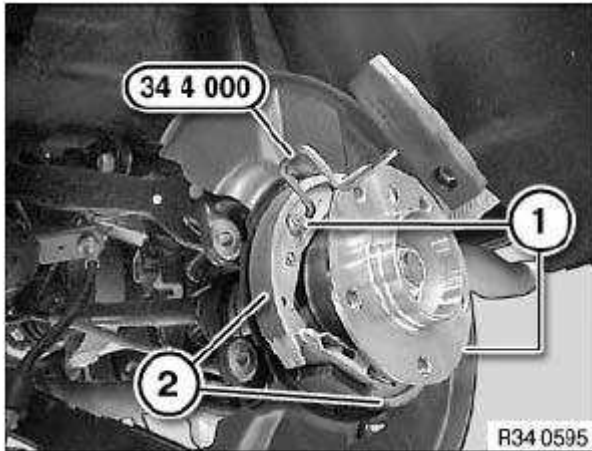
Clamping Pins, Brake Shoes With Special Tool (34 4 000)
